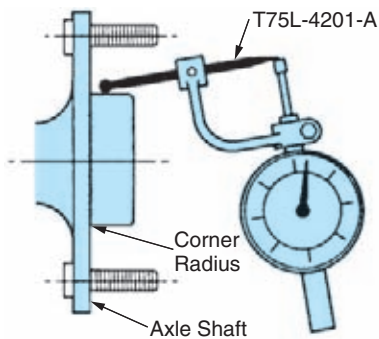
This dial indicator is set up to measure radial runout of the drum and wheel pilot, which can cause the wheel to run off-center. Note the wiggle bar (T75L-4201-A). (Courtesy of Ford Motor Company)
